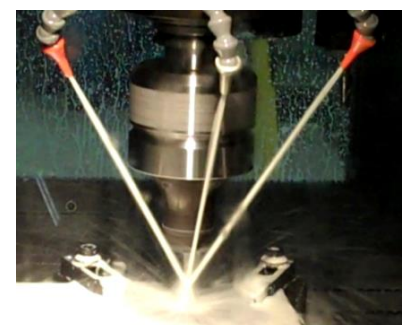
Ultrasonic machining invention dramatically improves productivity of conventional machine tools
